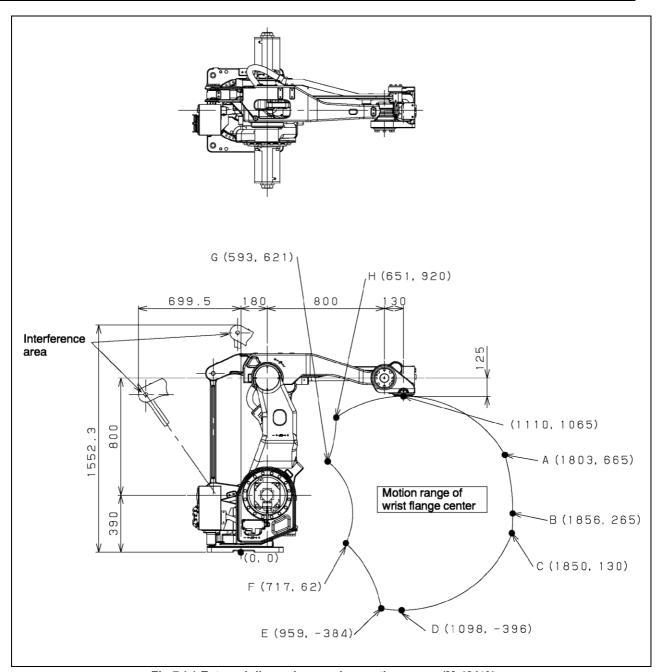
(c) External dimensions and operating space (M-421*i*A)
